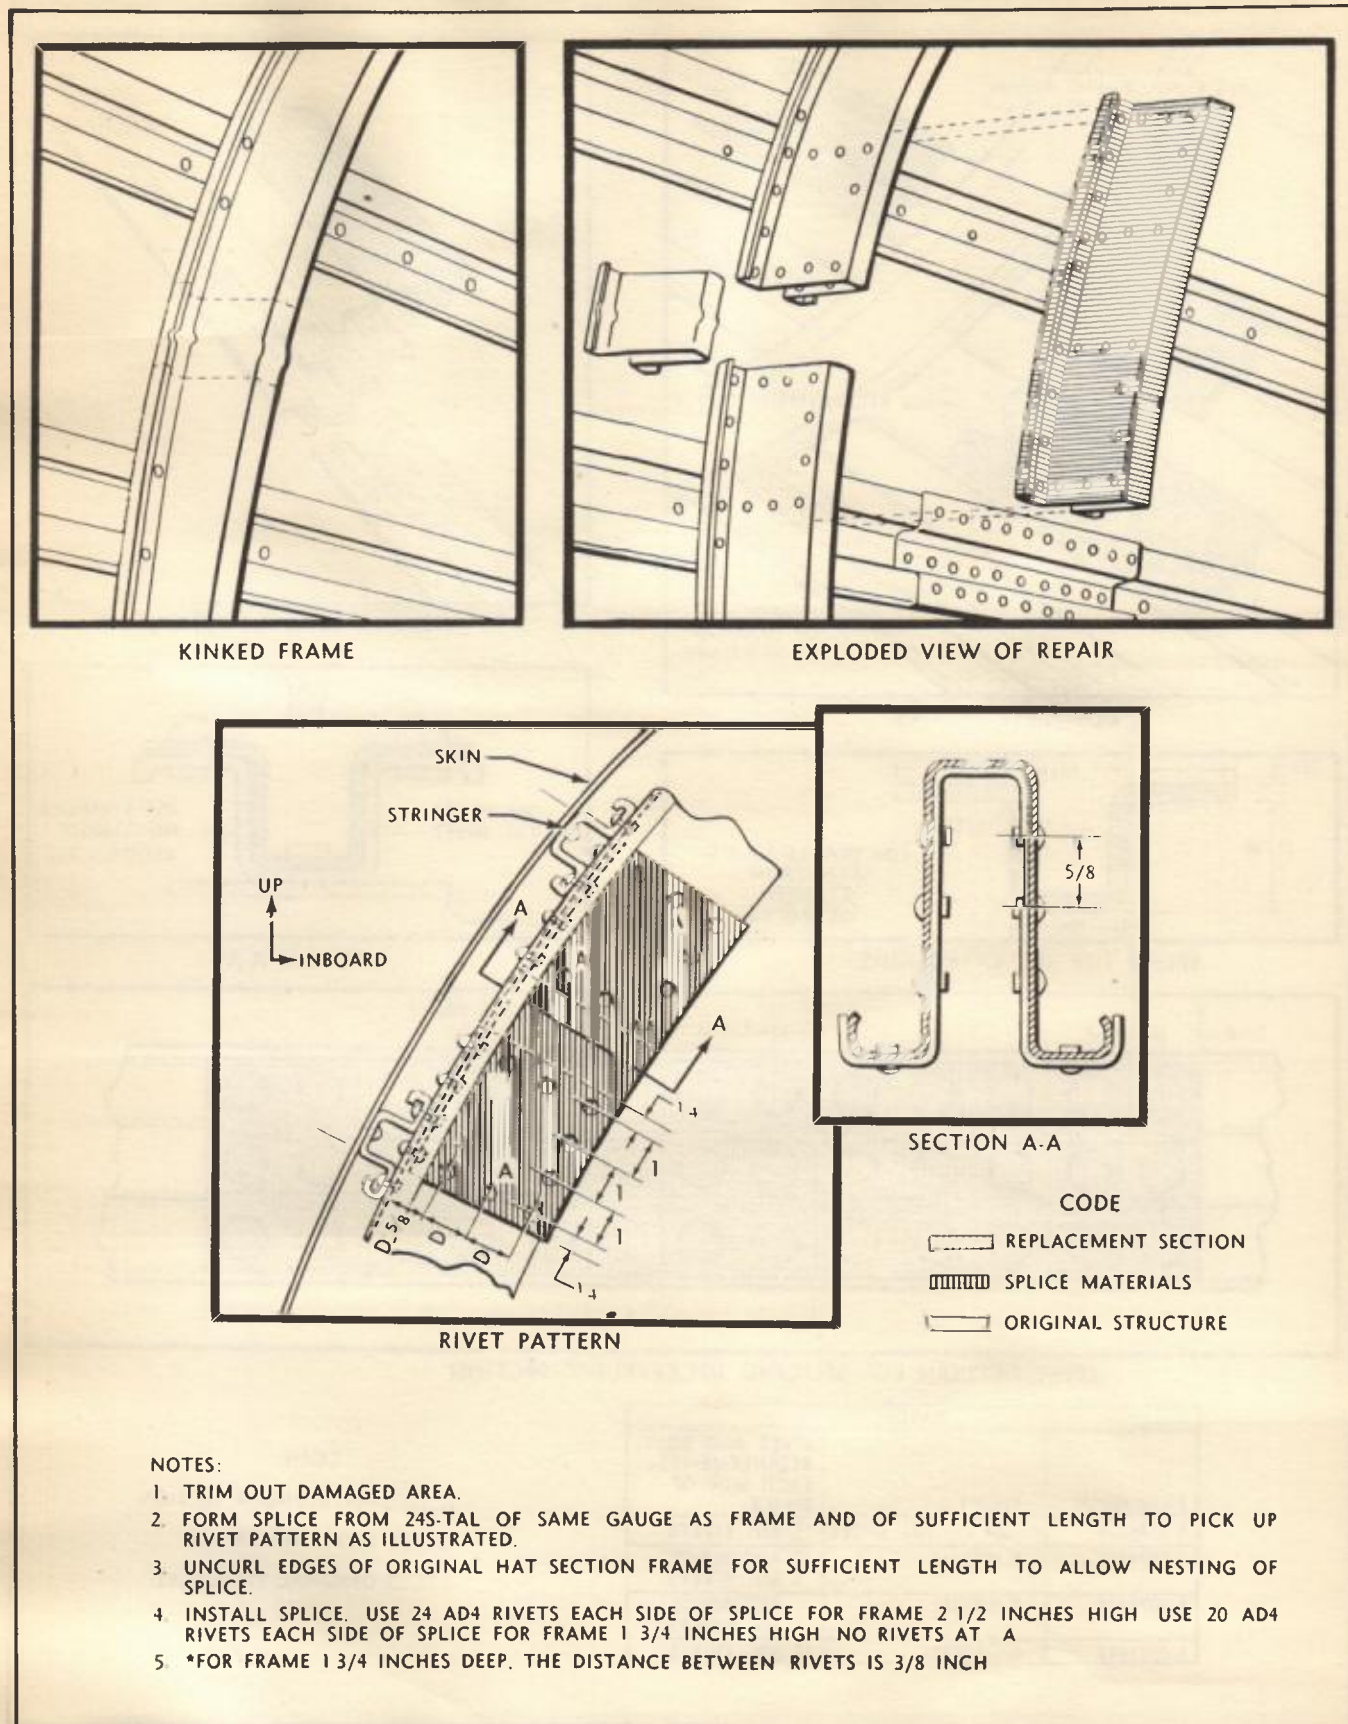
Fuselage Frame Repair — Rolled Hat Section
